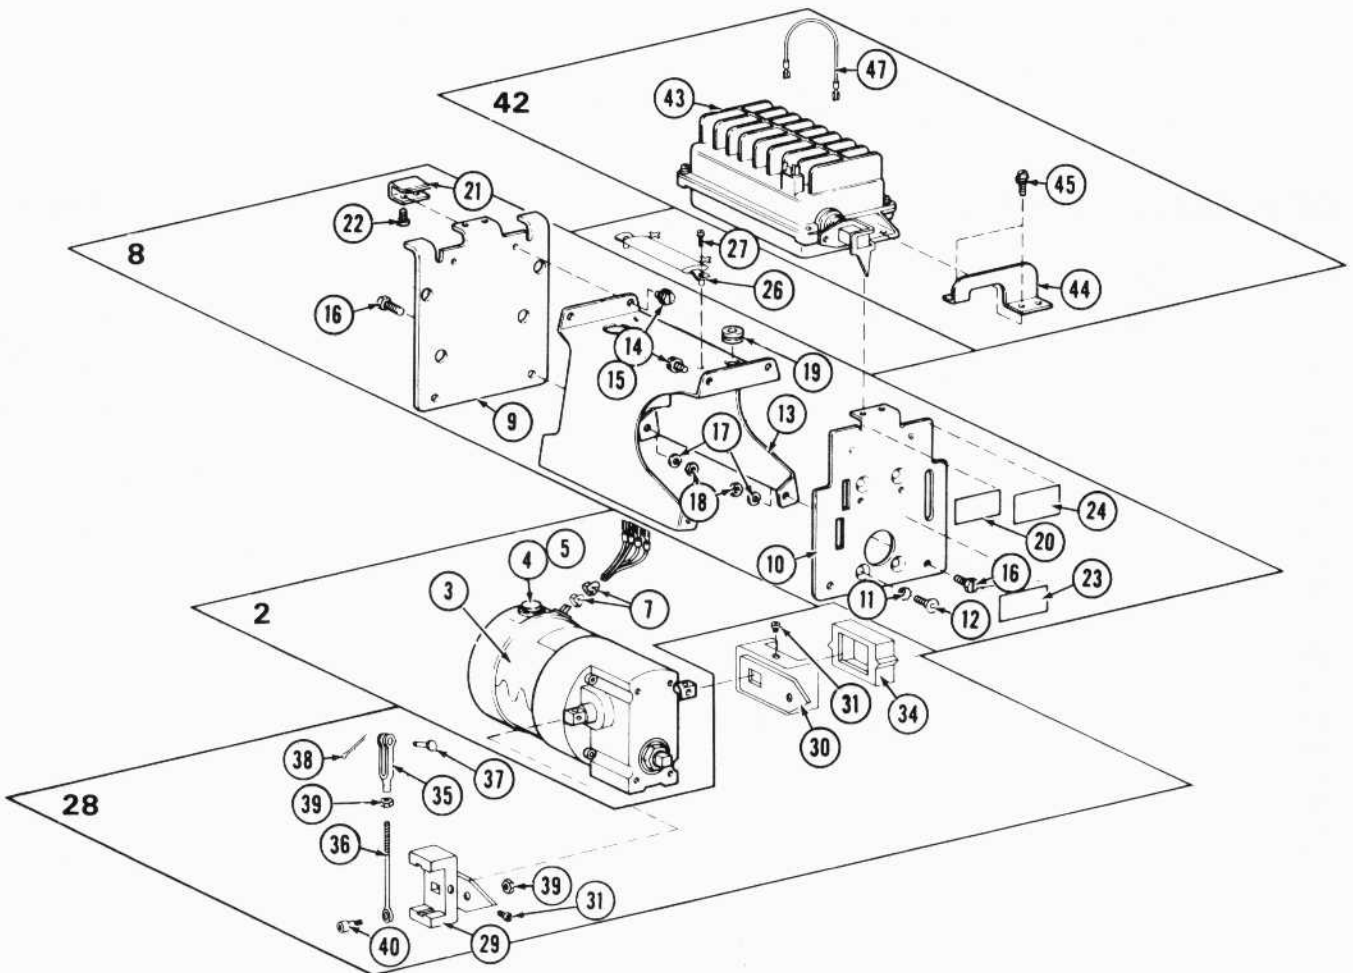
Motor Modules 8422928 And 8449939 Parts Kits
